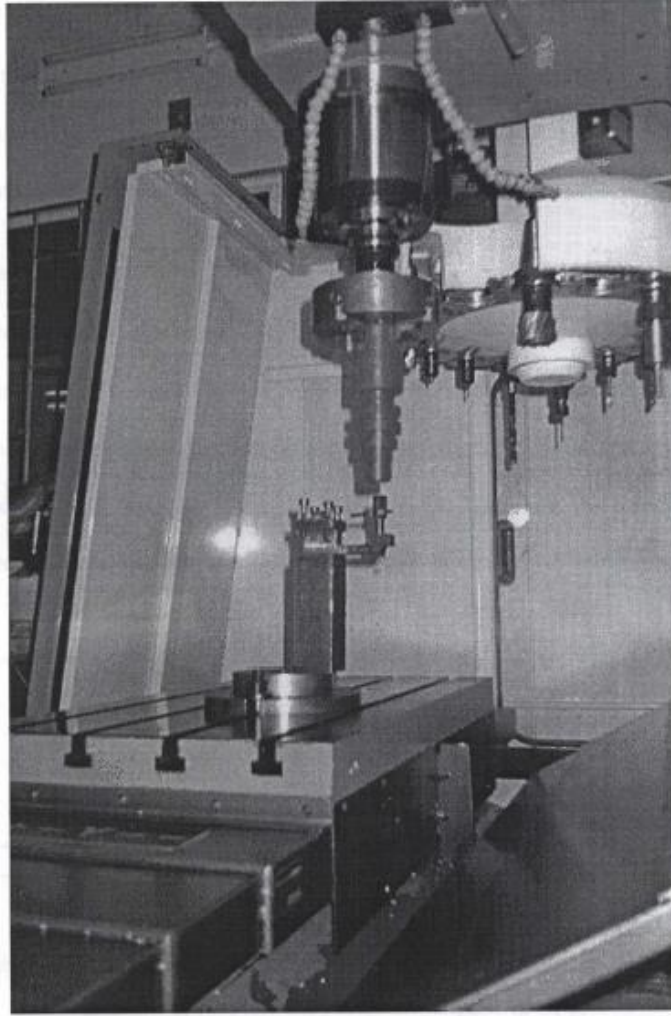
Workpiece and Tool Holder Fixtures in Position (Source: Mwanza, 2001)
